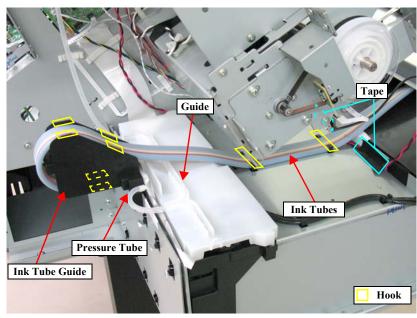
Releasing the Waste Ink Tube and Pressure Tube (before released)
